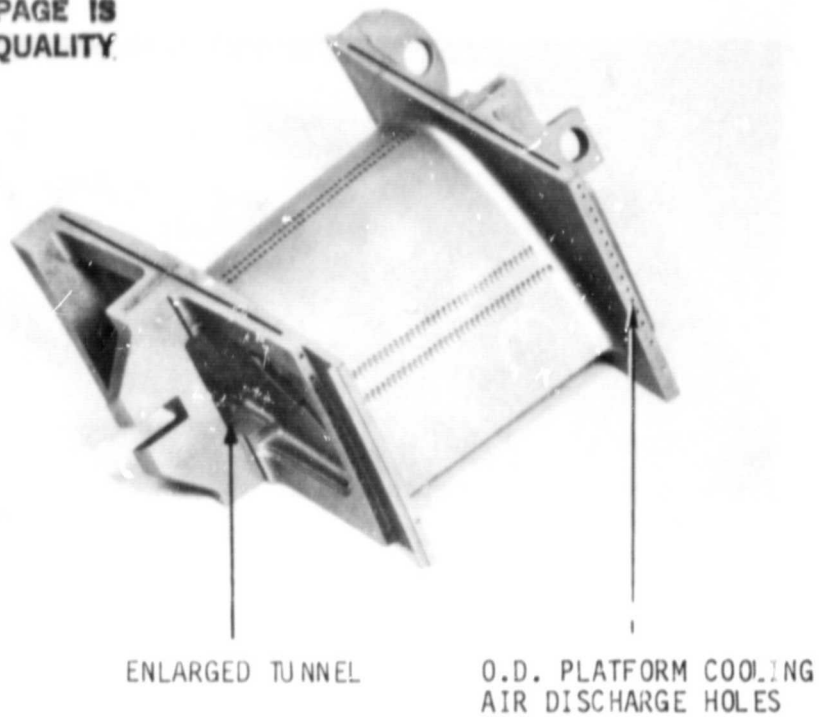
Enlarged Tunnel in Vane Inner Diameter Platform Attachment for Initial Engine Test.
